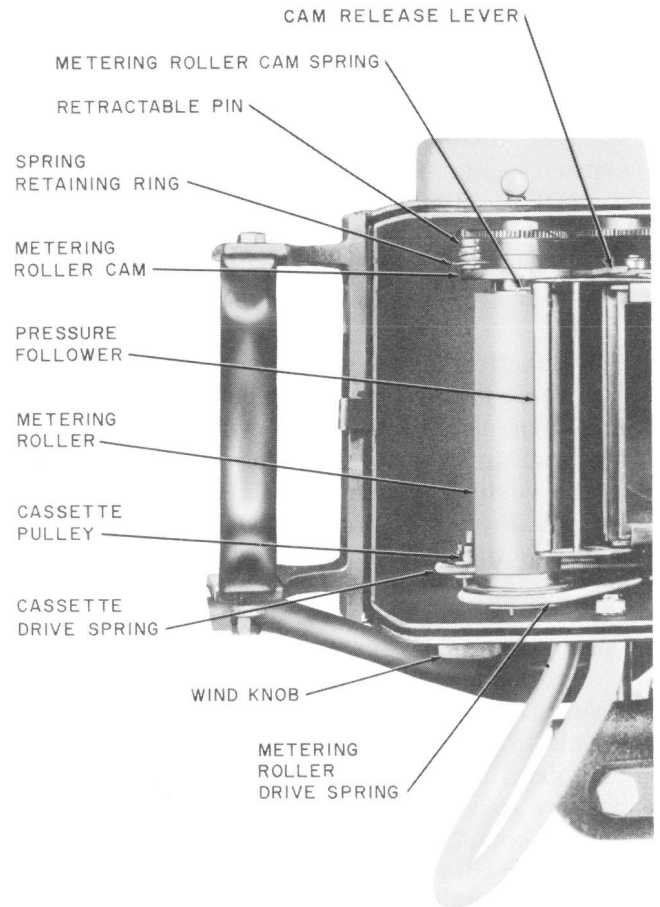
KS-14593 L2 Message Register Camera — Partial View Showing Metering Roller and Associated Parts
